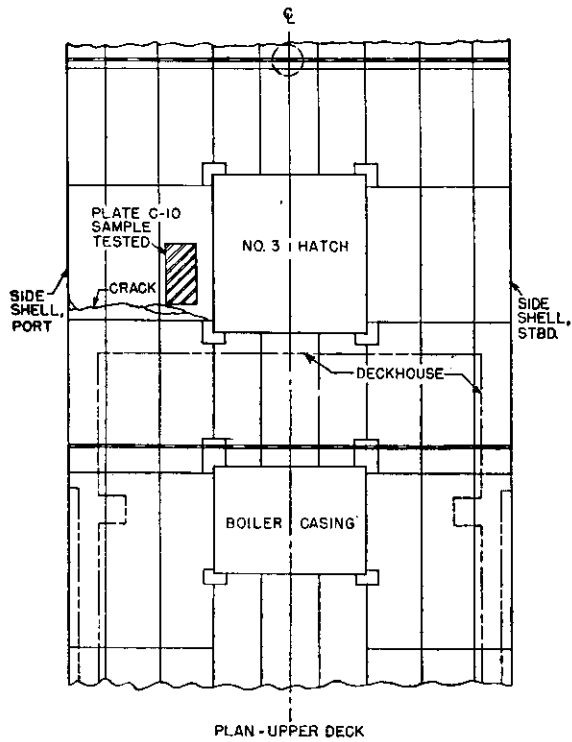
Pierre S. Dupont—Plan view of the upper deck showing the plate removed for testing and the adjacent crack
